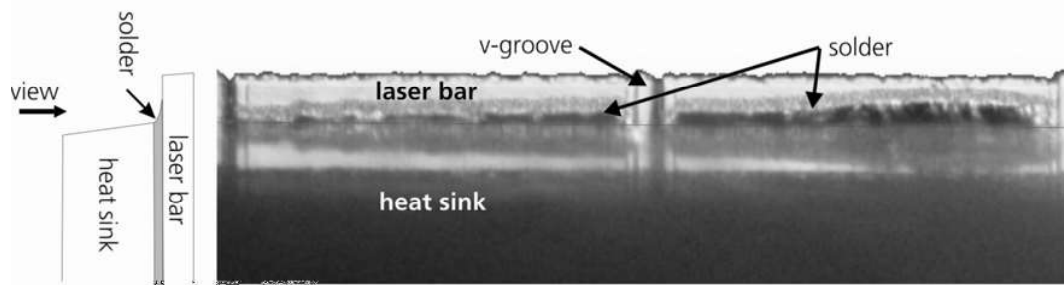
View on p-side (overhang) of a mounted laser bar. The wetting of the solder can clearly be seen.
